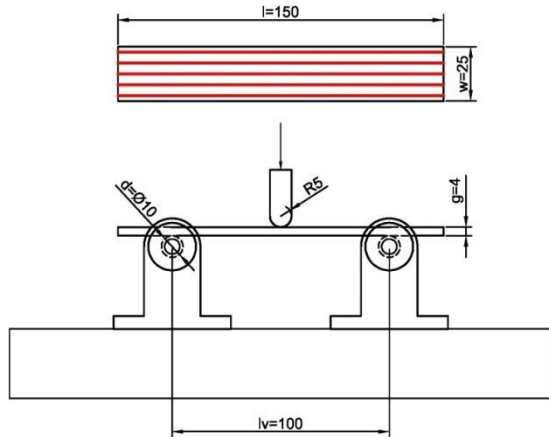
Nominal dimensions of specimens and defined load for three point bending tests
